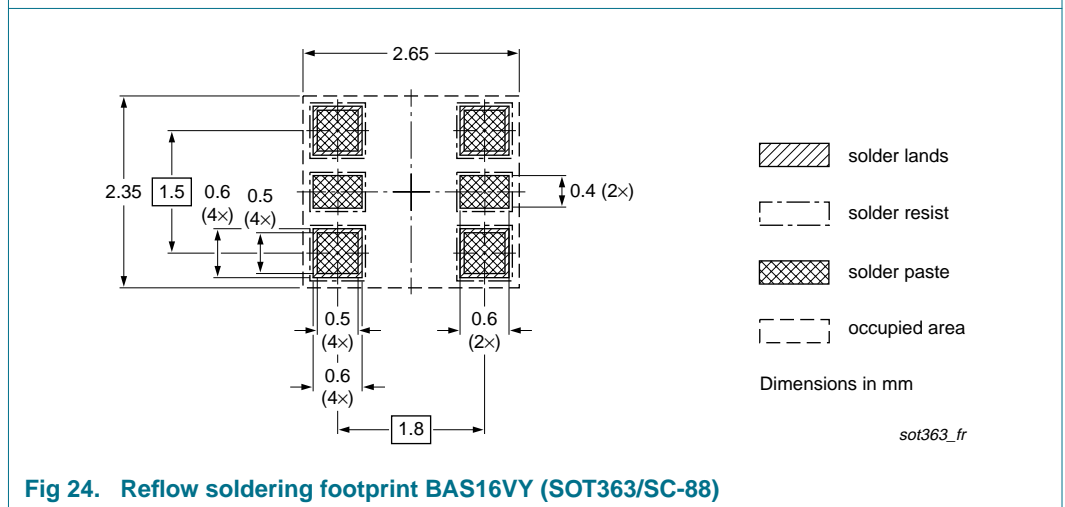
Reflow soldering footprint BAS16VY (SOT363/SC-88)
